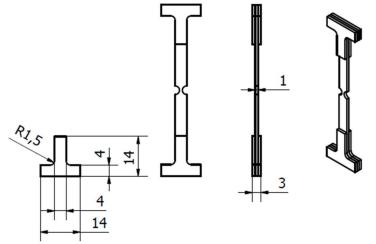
Dimensions of the aluminium end tabs for double-notched tensile specimens for synchrotron CT and view of the fully assembled specimen.
